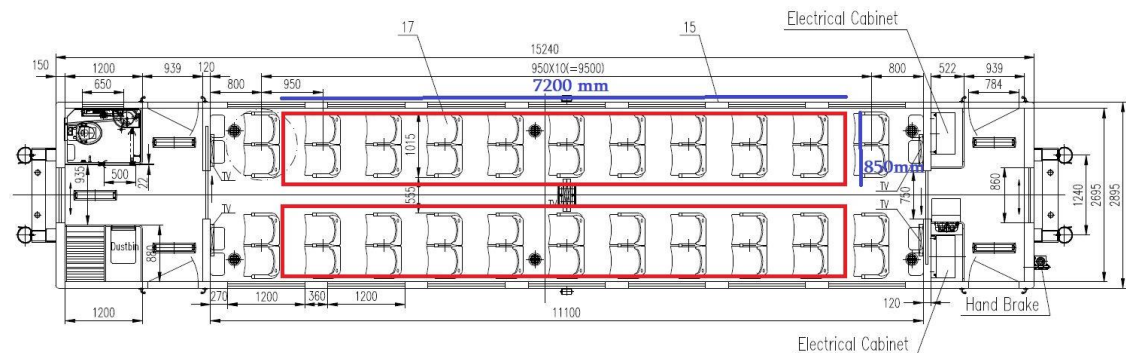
Battery module assembly layout within the dimensional layout of S14 AFC compartment
